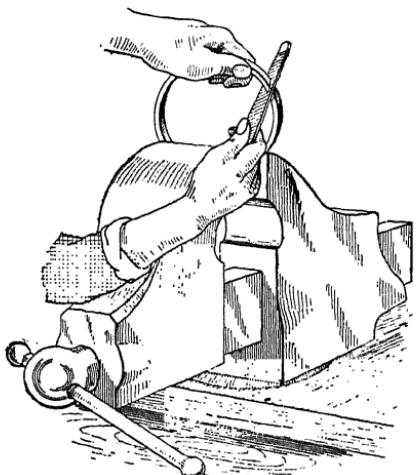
Filing Ends of Piston Ring When Fitting to Cylinder
